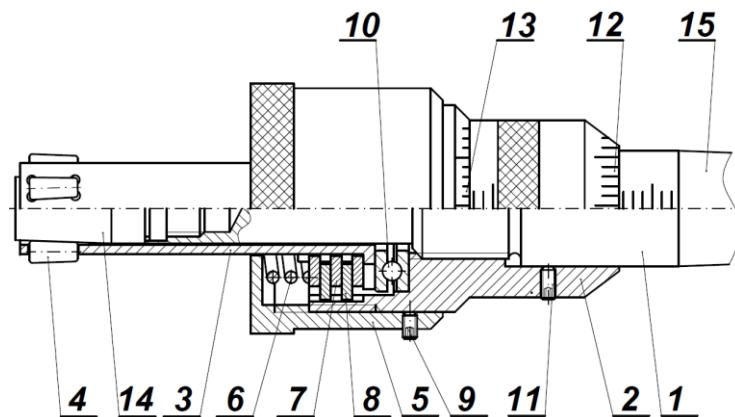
Device for strengthening burnishing of holes with adjustable rolling resistance force of burnishing rollers: 1-main mandrel, 2-nut for adjusting the burnished diameter, 3-roller guide basket, 4-burnishing rollers, 5-nut for adjusting the braking torque, 6-spring of the multi-plate brake, 7-movable plate of the roller basket, 8-fixed brake plate, 9-screw for locking the set braking torque, 10-basket thrust bearing, 11-screw for locking the set burnishing diameter, 12-scale of the set diameter, 13-scale of the set braking torque, 14-replaceable track of the burnishing rollers, 15-grip part.[3]
